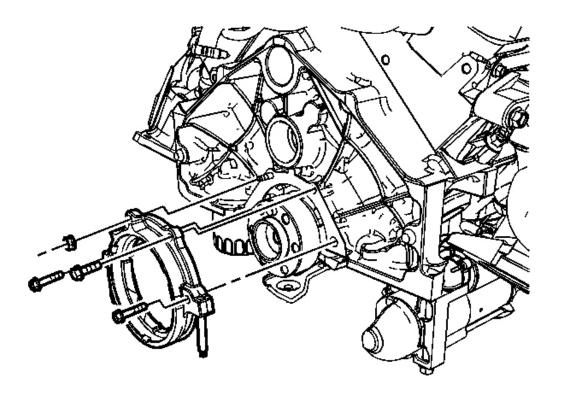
Crankshaft Rear Oil Seal Housing Courtesy of GENERAL MOTORS CORP.
